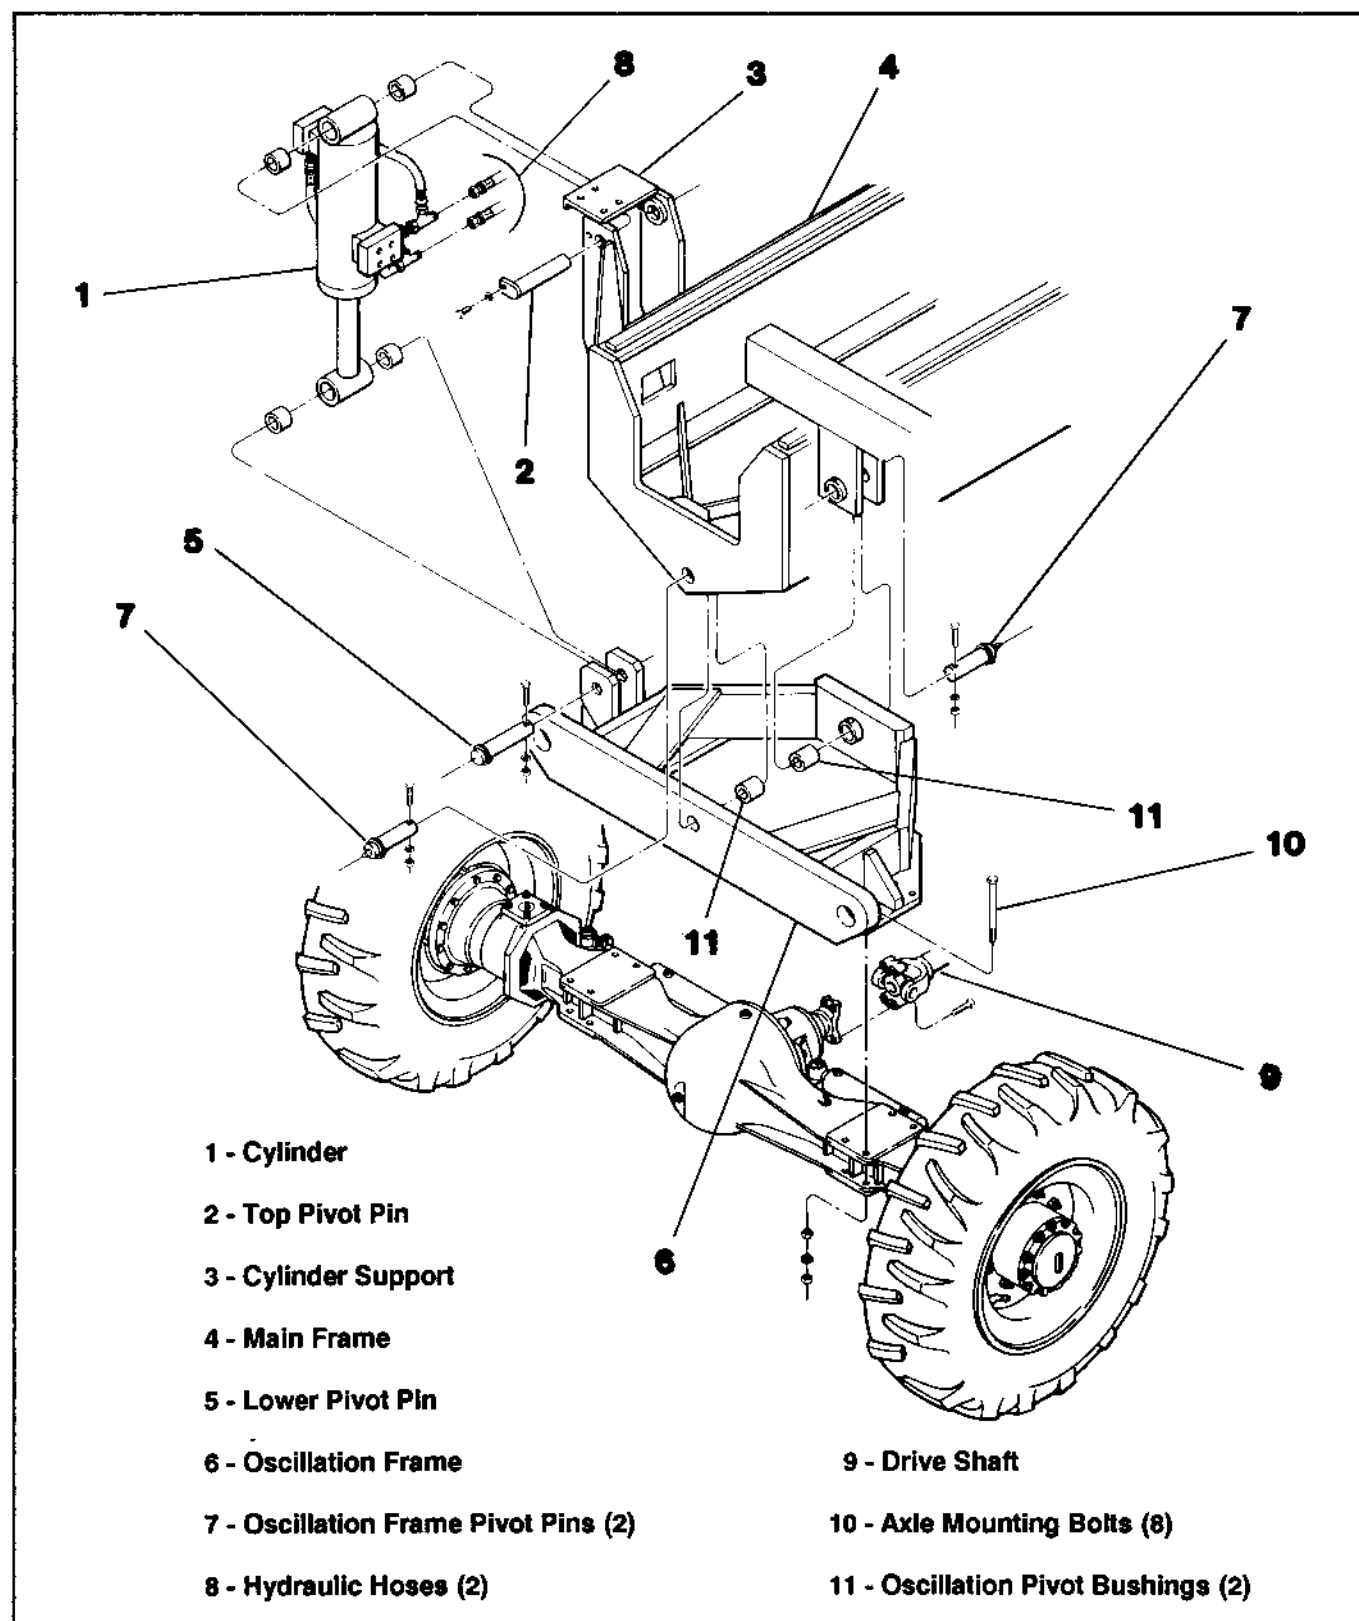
Frame Tilt & Oscillation Assembly (Front Axle)
